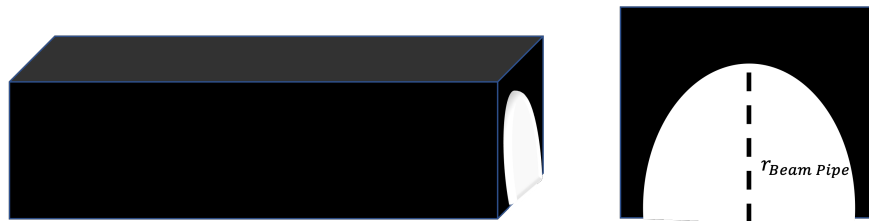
Schematic drawing on the left is a side view of the centering device that would be fitted onto the external beam pipe. The digital model on the right is a front view of the centering device.
